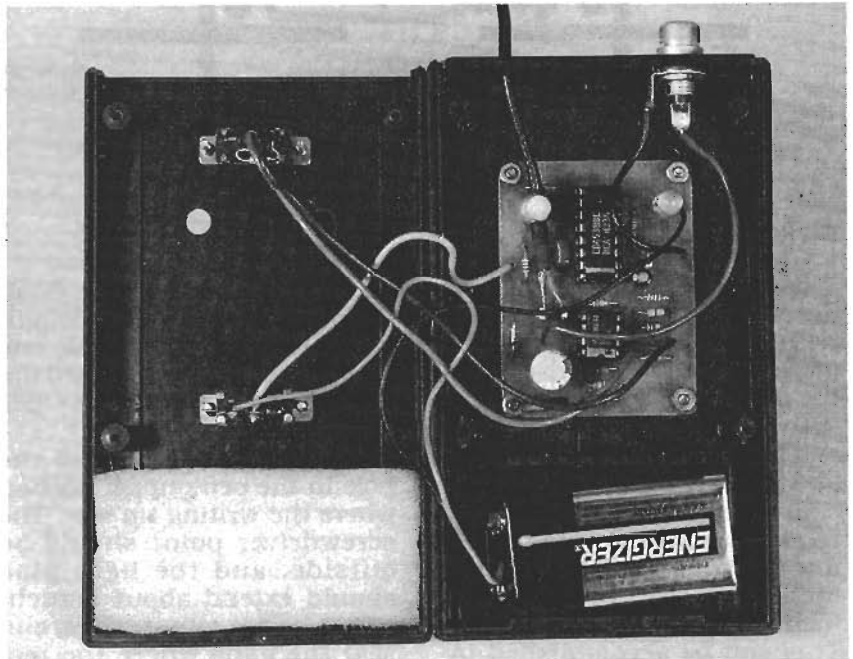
THE INSIDE OF THE COMPLETED UNIT. You can use the same case (see the Parts List) or any other that will accept the board and a 9-volt battery.
